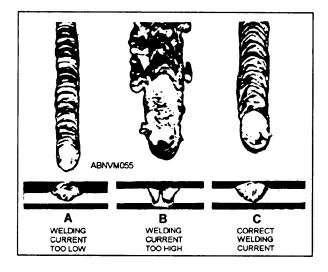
Weld bead characteristics determined by welding current.
